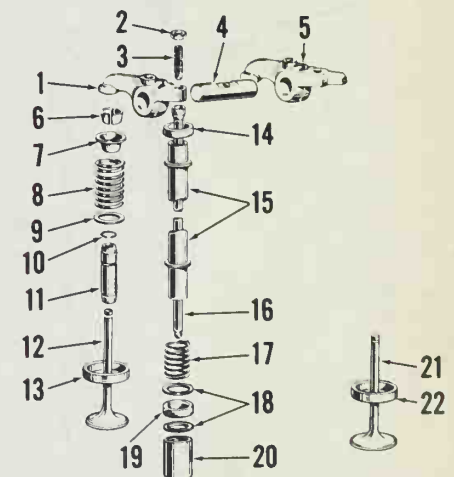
Exploded view of valve train. On Models WD1-660, WD1-670 and WD1-750, an inner spring is located inside valve spring (8) and circlip (10) is not used.
